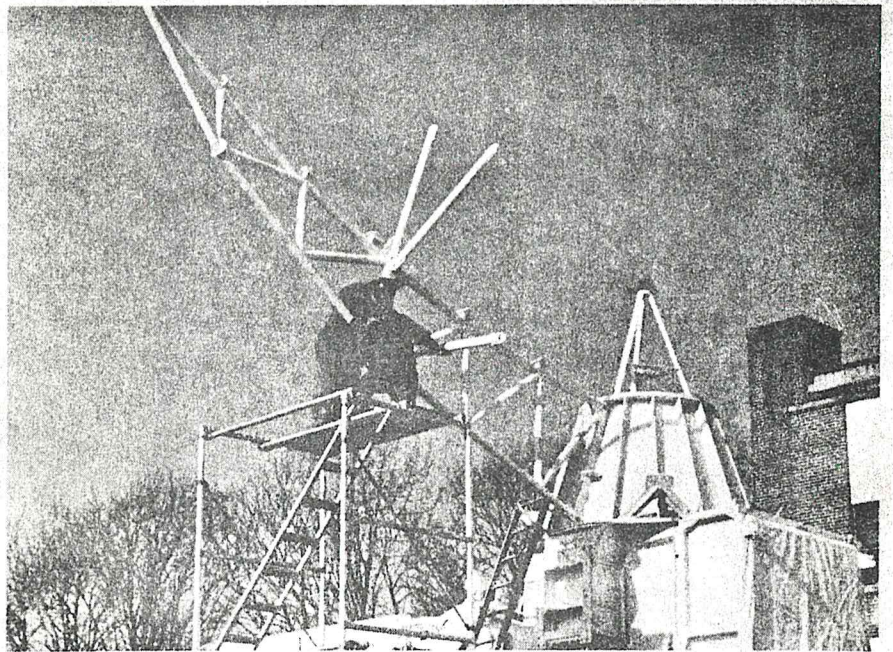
ASSEMBLE REFLECTOR BACK-UP STRUCTURE
